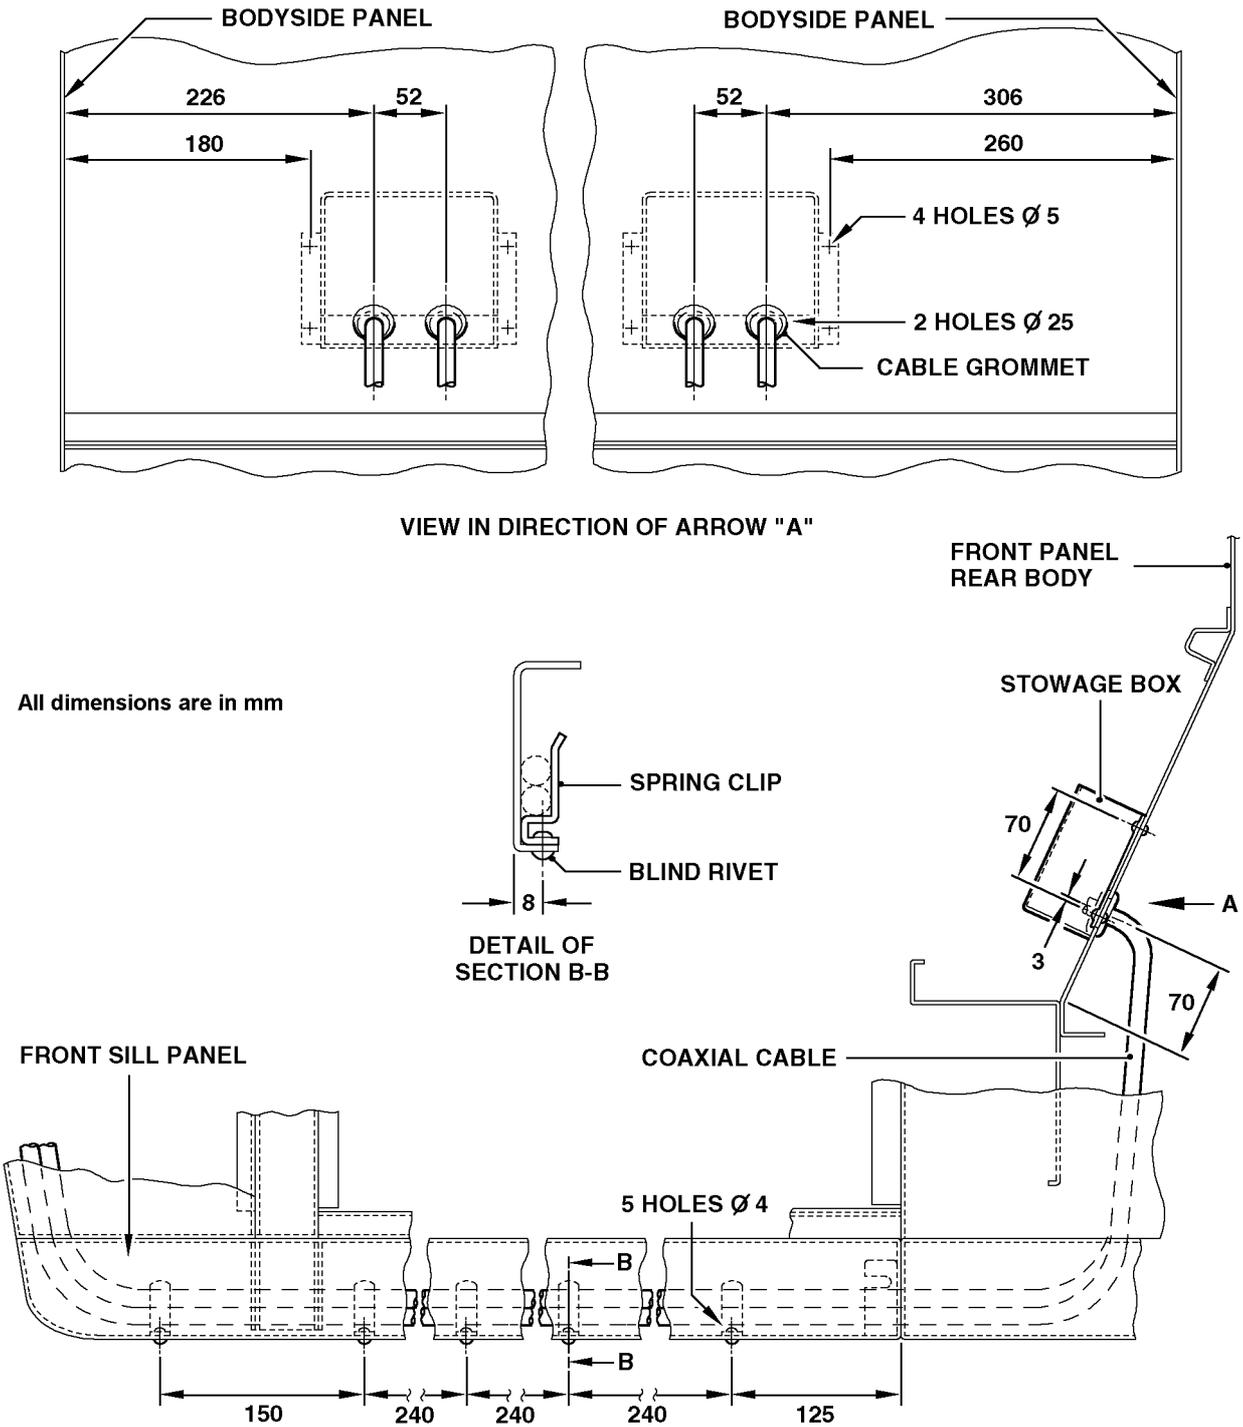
Fitting details of wing reinforcement/aerial mounting and stowage
